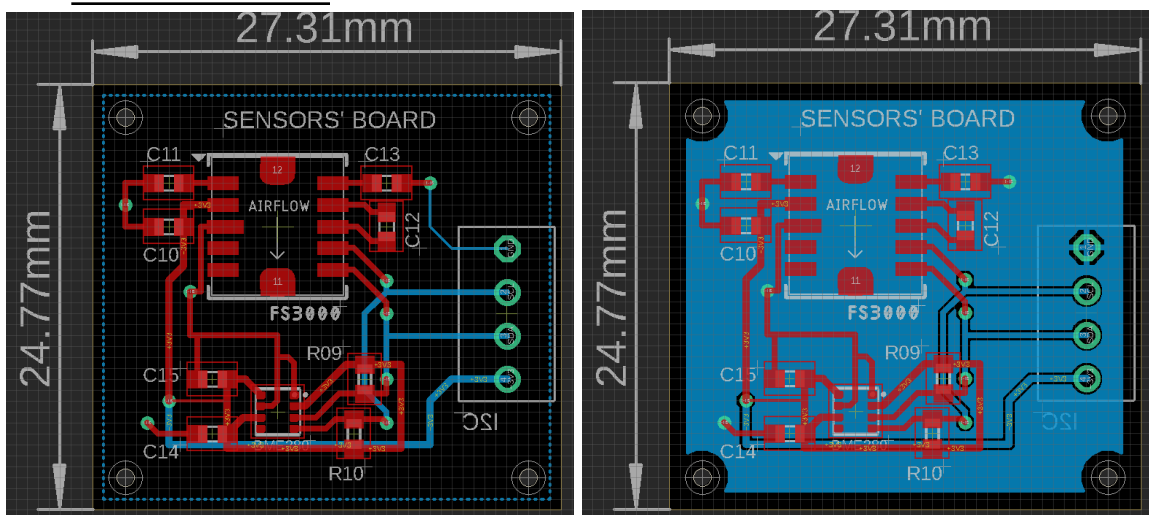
PCB Layout of Sensors' Board (a. w/o GND place; b. w/ GND plane)
